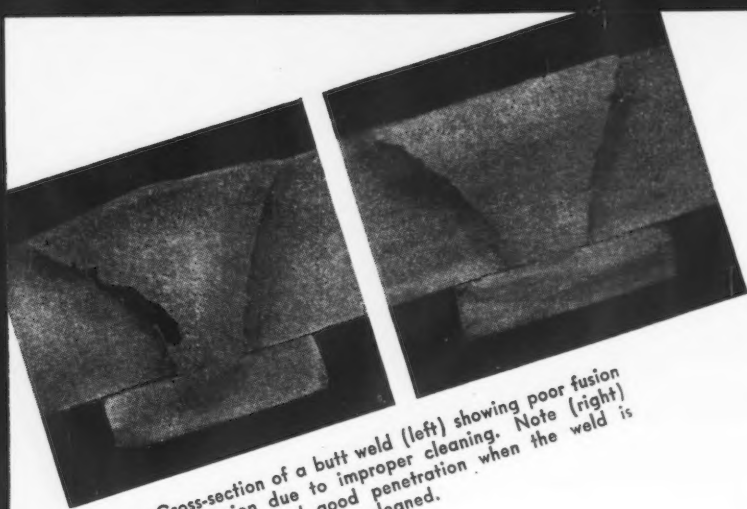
Cross-section of a butt weld (left) showing poor fusion and slag inclusion due to improper cleaning. Note (right) the complete fusion and good penetration when the weld is properly cleaned.
